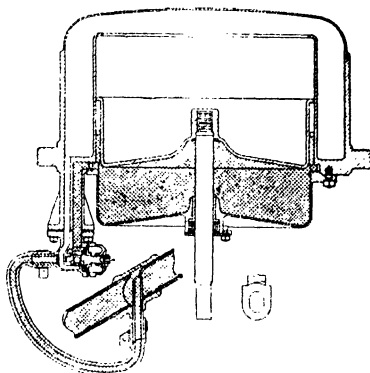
'Prestall' Wrought Steel Vacuum Brake Cylinder with external ball valve. Piston in 'brake on' position. A brake application is made by admitting air to the shaded portion below piston. The non-return ball valve prevents air re-entering the space above piston.
